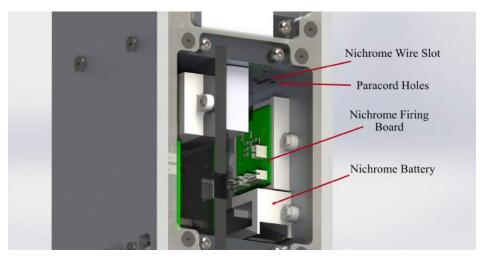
Nichrome Wire Cord Cutter Mechanism
